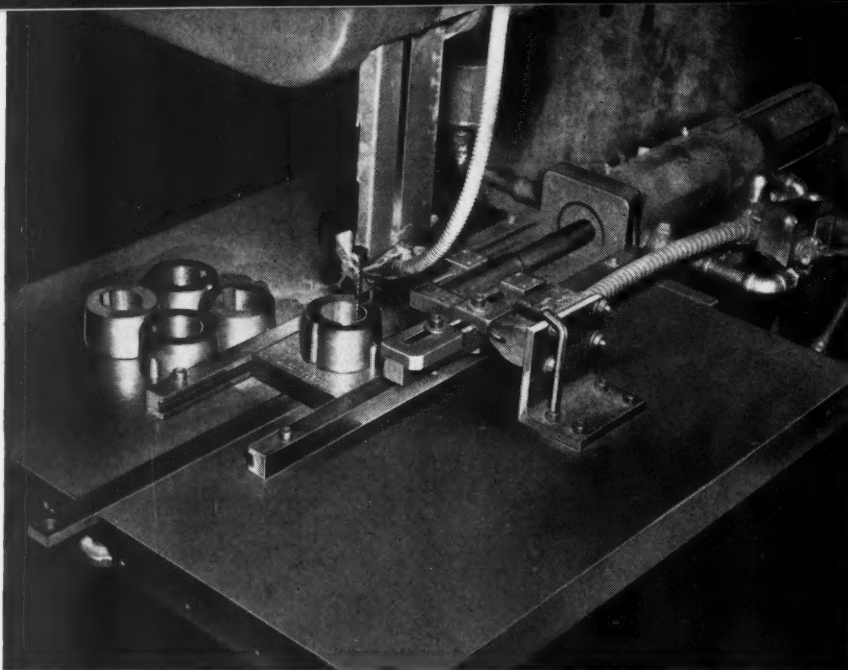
Semi-automatic operation in the slitting of special tapered bushings is obtained by means of a hydraulically actuated, double-acting work-holding fixture
